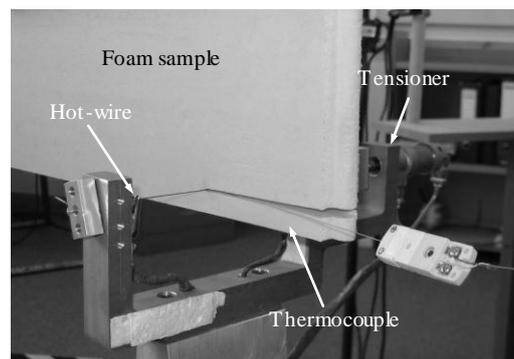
Test apparatus with thermocouple measuring active hot-wire cutting temperature.
